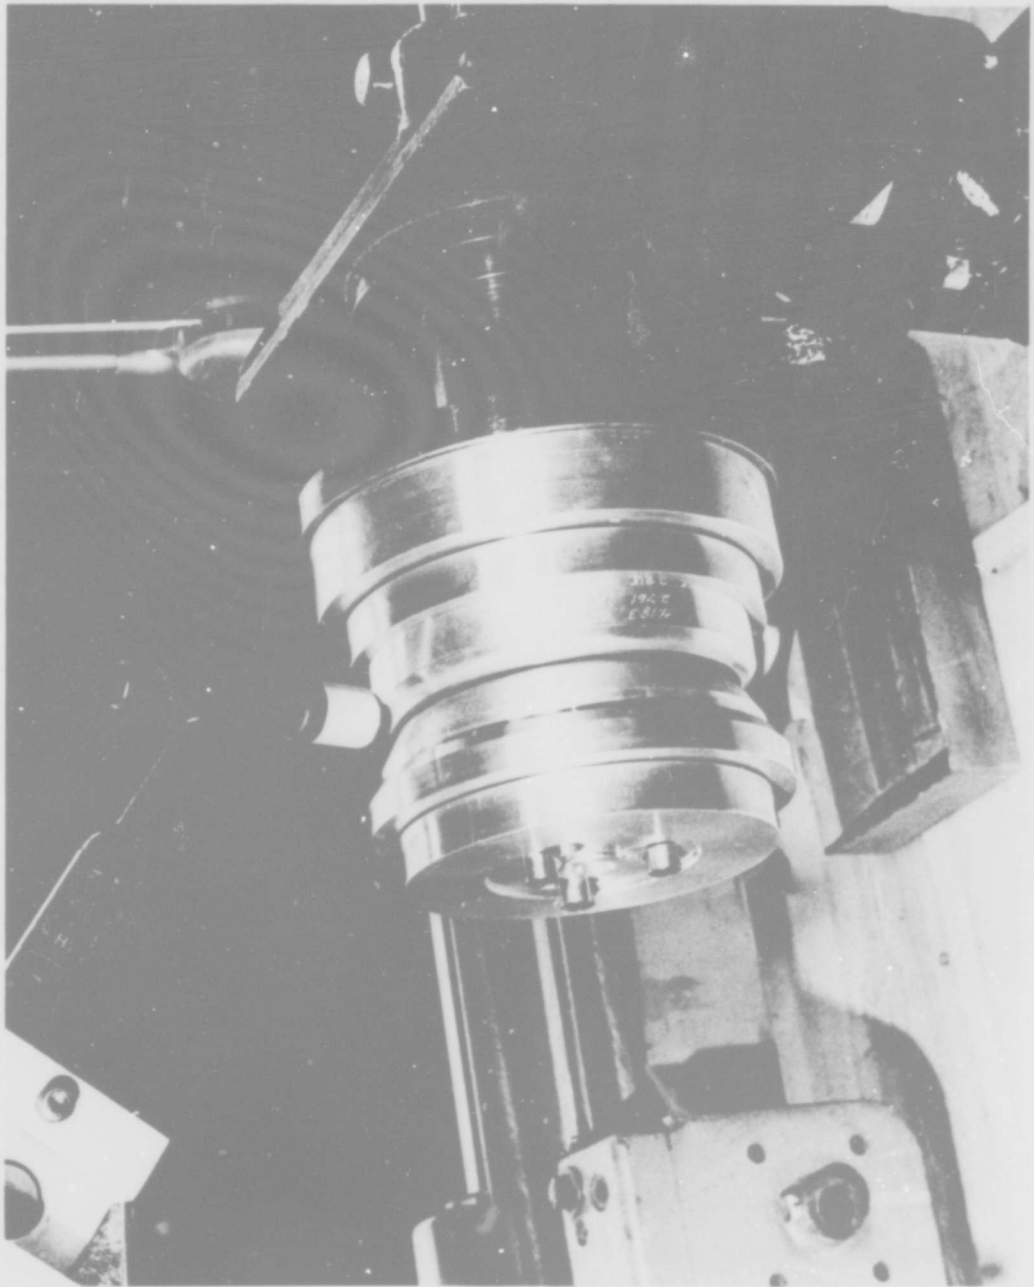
SETUP FOR MAKING AN OUTER CONVOLUTION WELD
